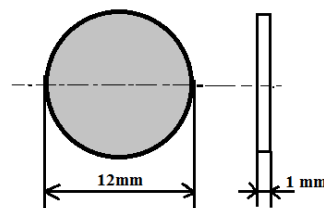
PTC dimensions of A60 B59060A0040A010 produced by EPCOS
